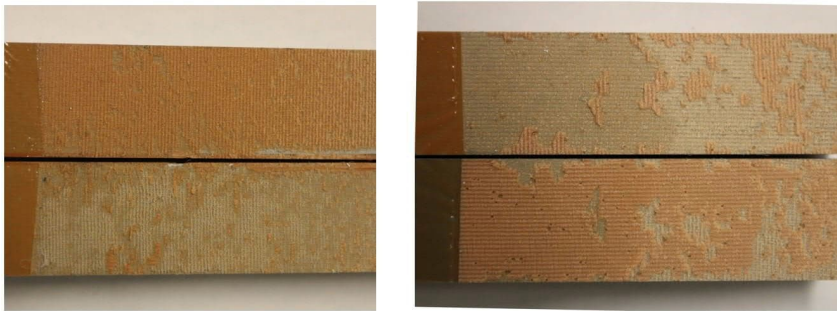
Fracture surface fractography of SLBa (left) and SLBb (right) specimens after testing.
